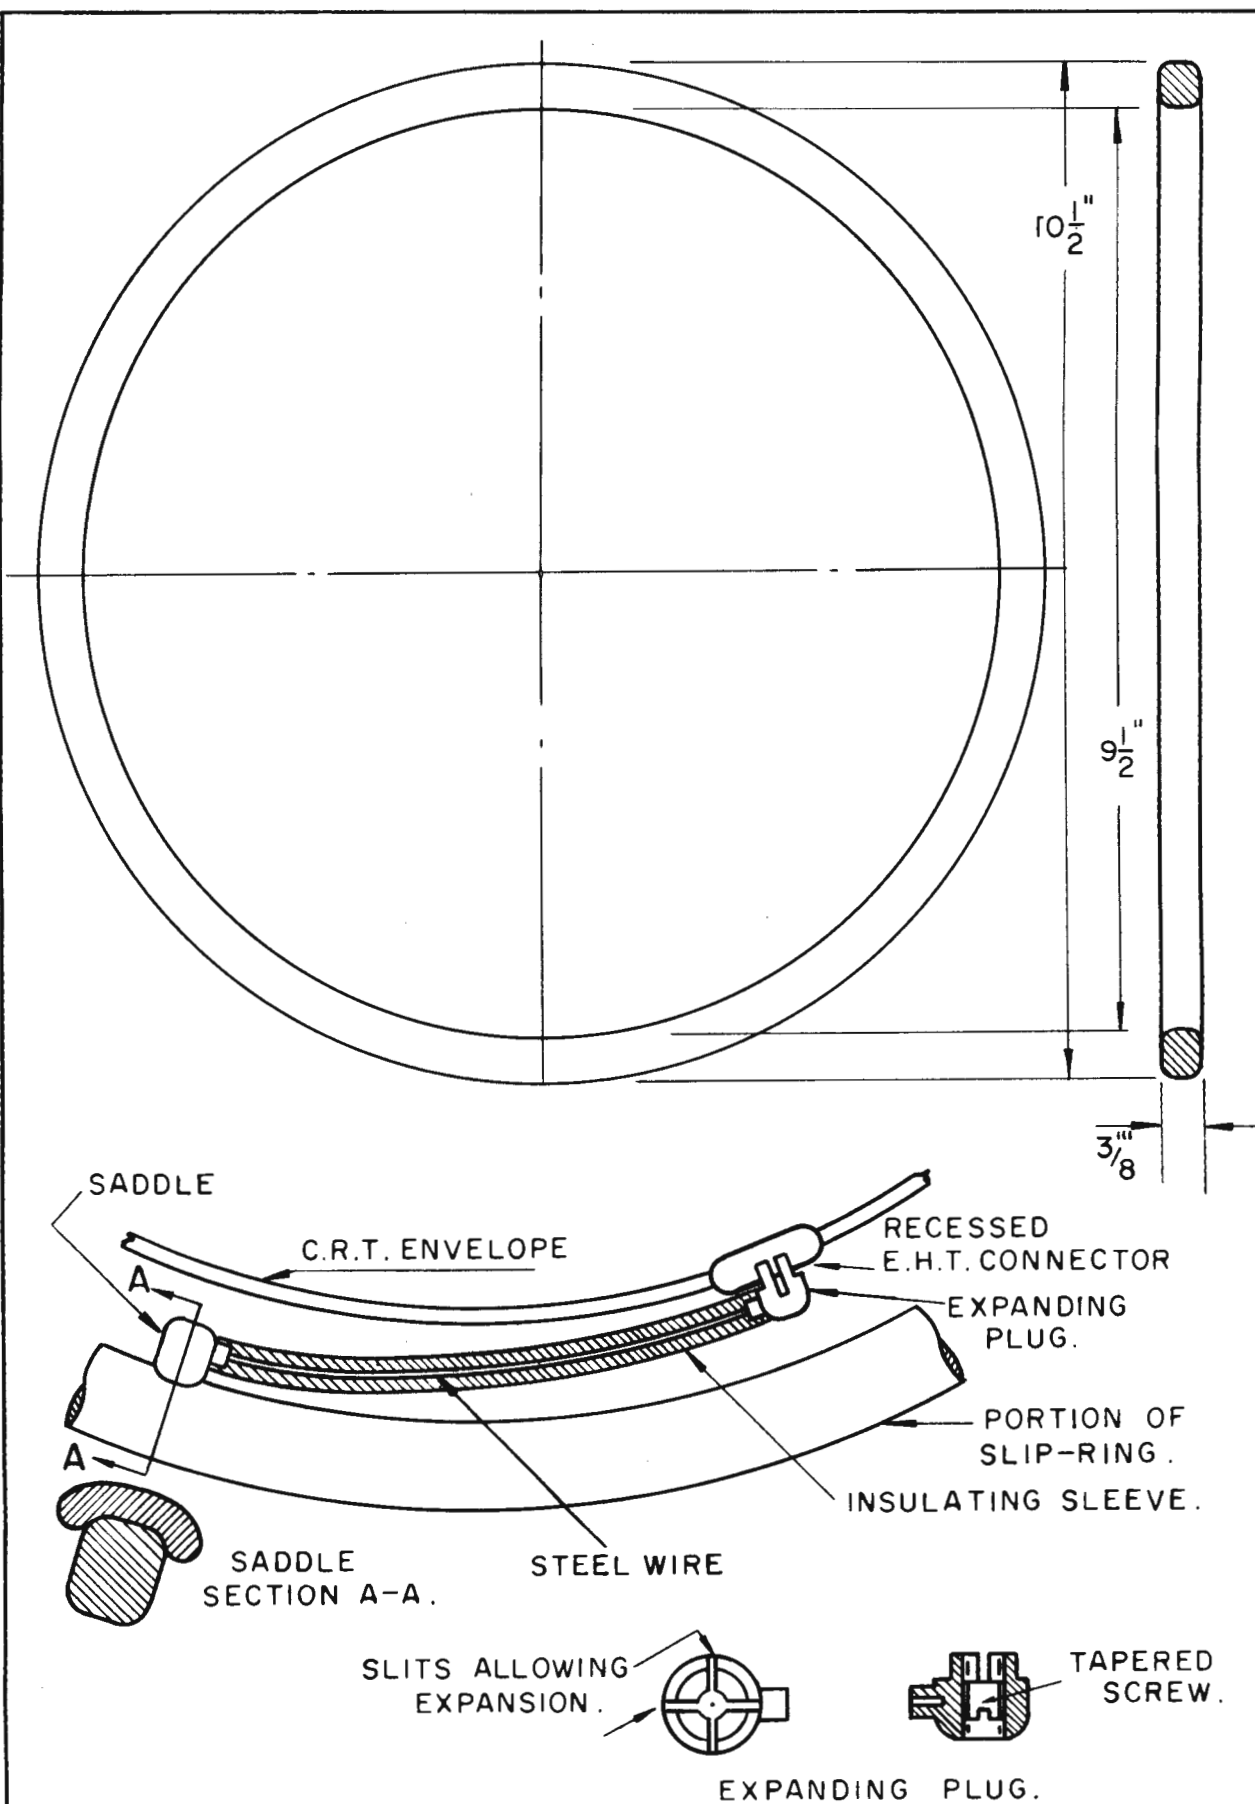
E.H.T. Slip - ring, saddle, insulated steel coupling wire and expanding plug.
